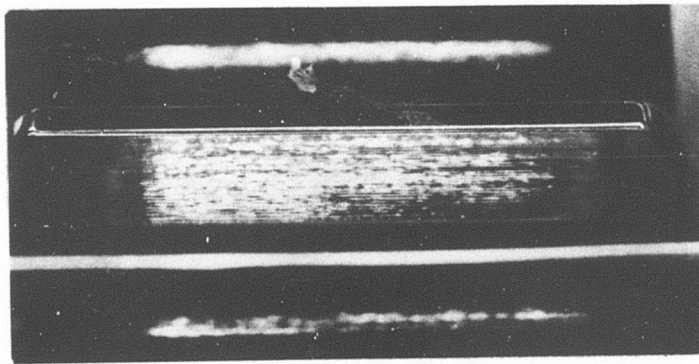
Lower Planetary Gear Following Input Pinion Failure at 90% Torque, $300^{\circ}\pm 5^{\circ}\text{F}$ Ring Gear Side.
